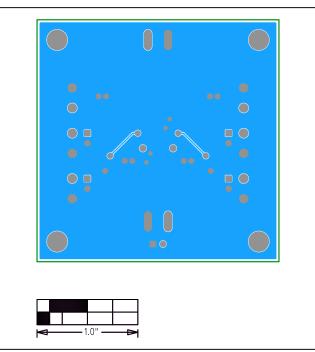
MAX40018 EV Kit PCB Layout—Solder Side
